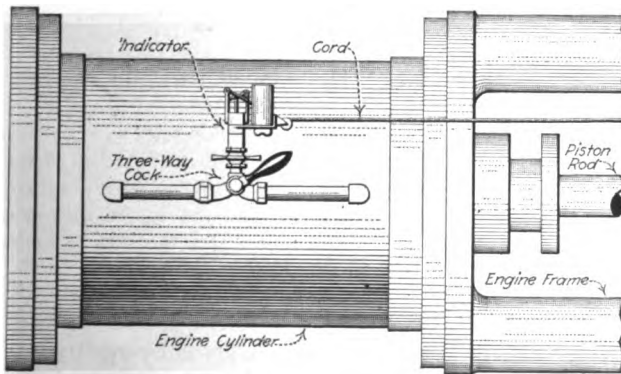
Arrangement for using one indicator for both ends of a cylinder.
